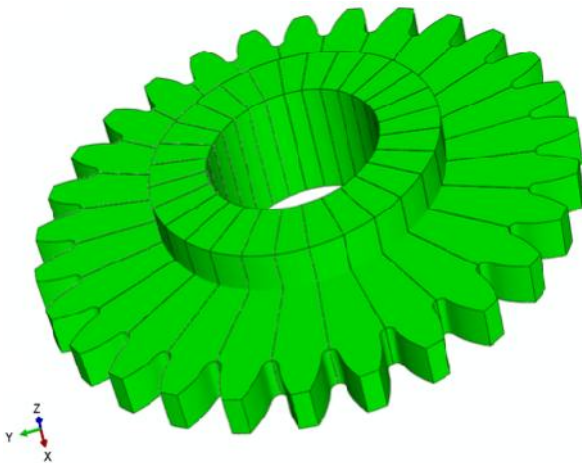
A spur gear made of AISI 8620 steel which should be carburized and quenched
